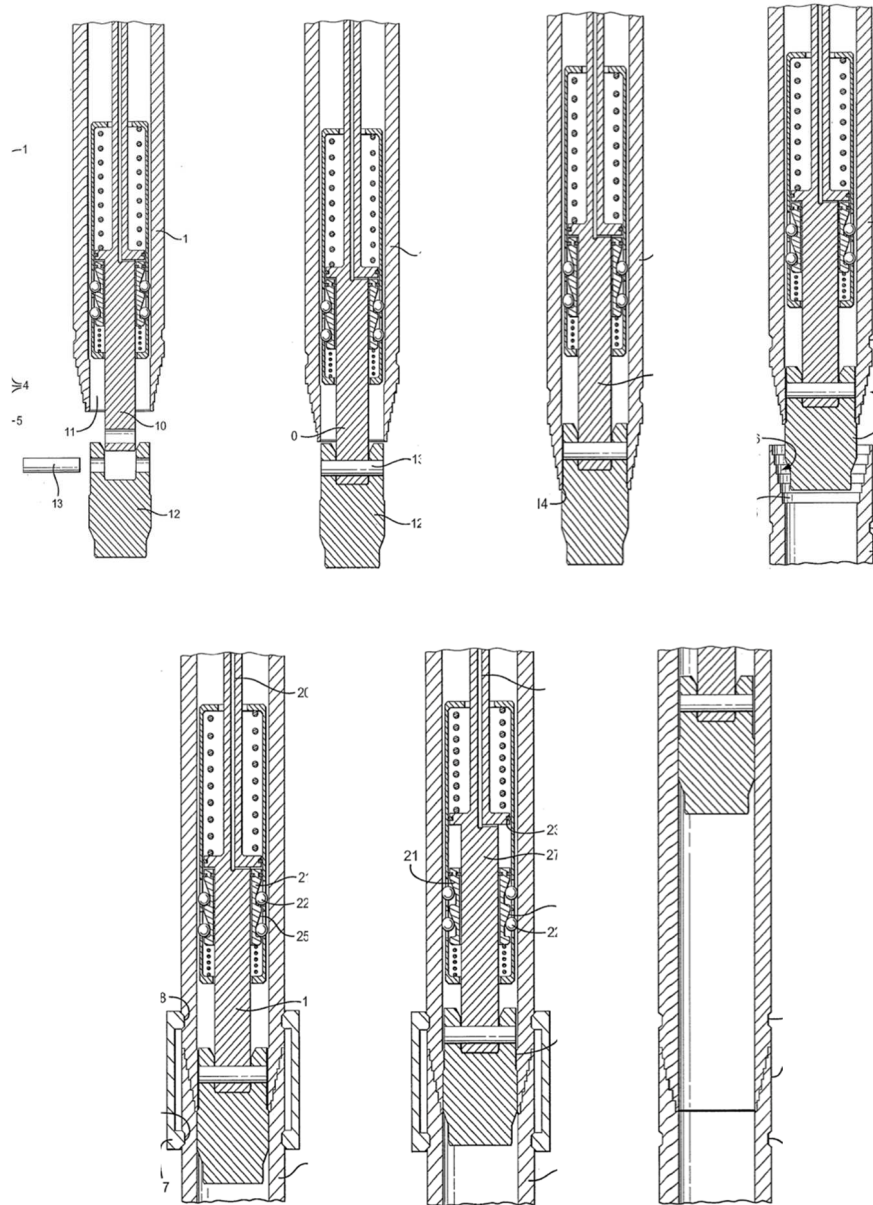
Non-threaded tool joint assembly process as proposed by Lurie and Head [27].
